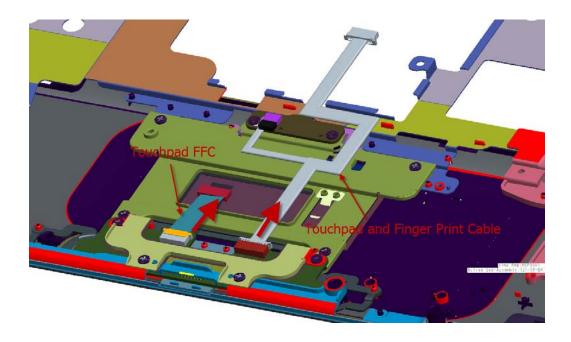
Remove the touch FFC and Fingerprint cable
